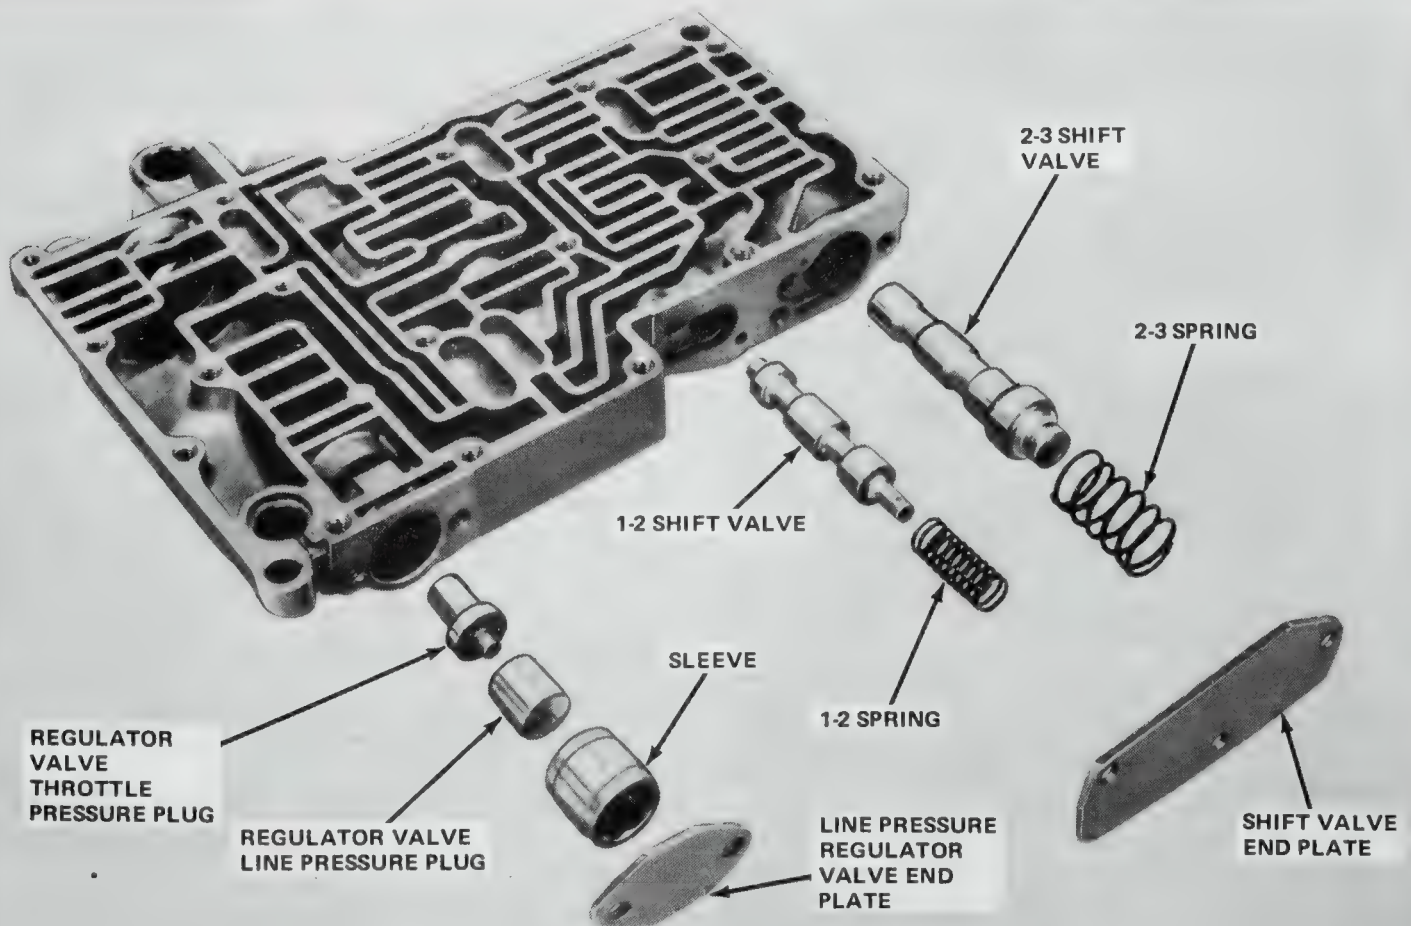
C-49 Shift Valves and Pressure Regulator Valve Plugs—Model 904
